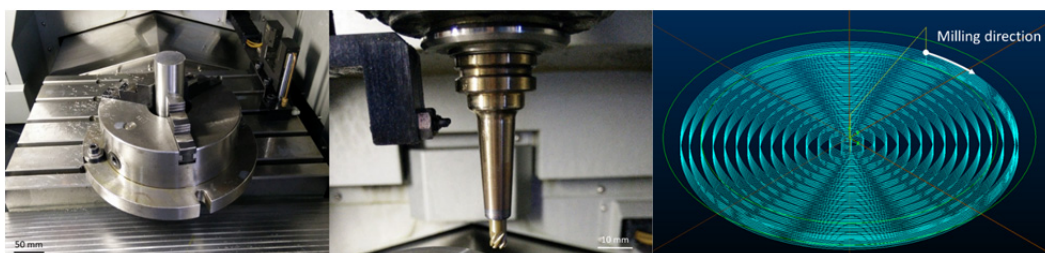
Workpiece clamping (left), shrink-fit ceramic tool clamping (middle), spiral milling strategy (right) [13]
